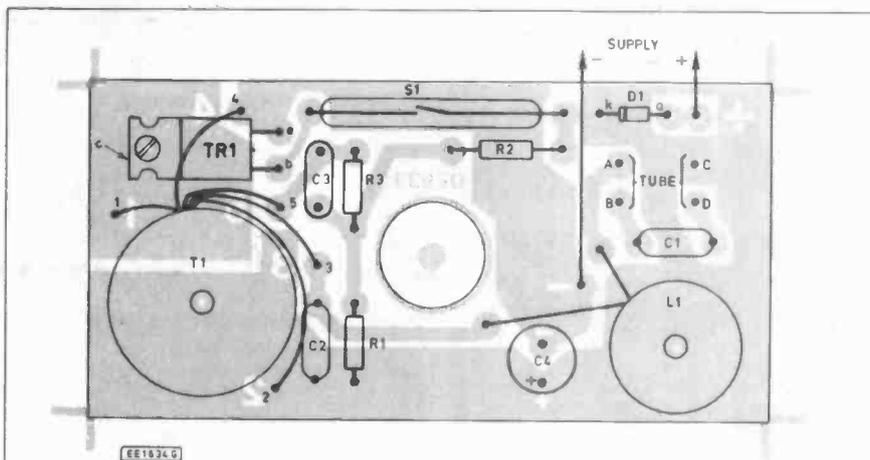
Printed circuit board component layout. The centre of the board is cut out to take the u.v. tube.
